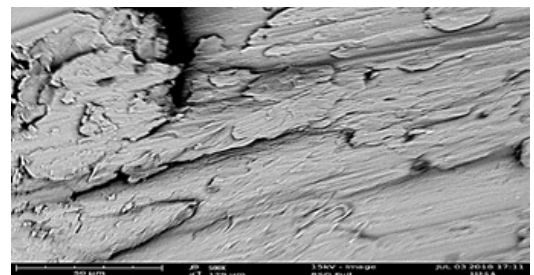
Fracture surface of test specimen of medium heat inputs at 500X
